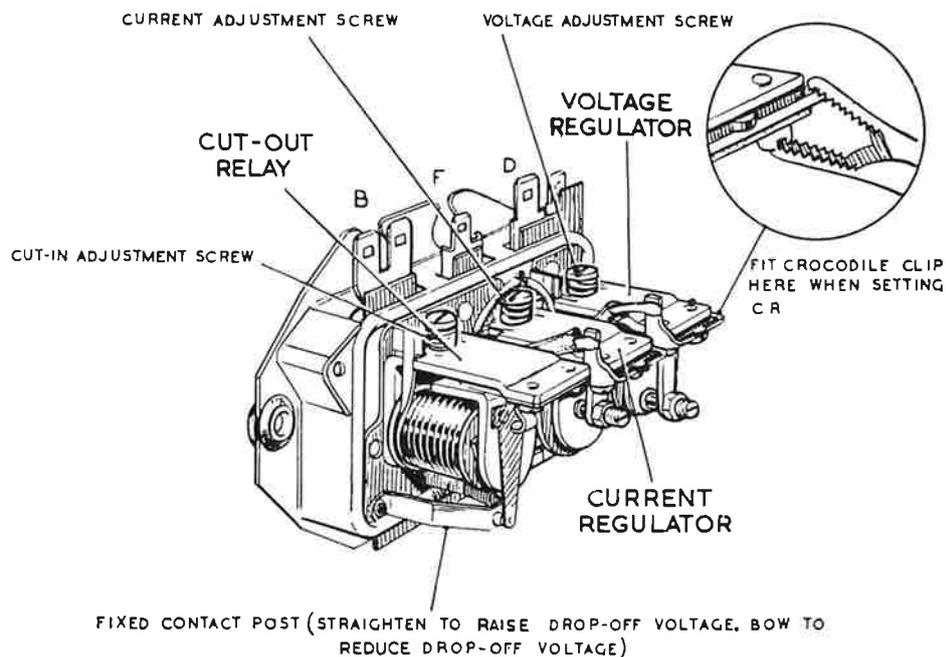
The RB.310 control box showing the position of the three spring loaded adjusting screws.
